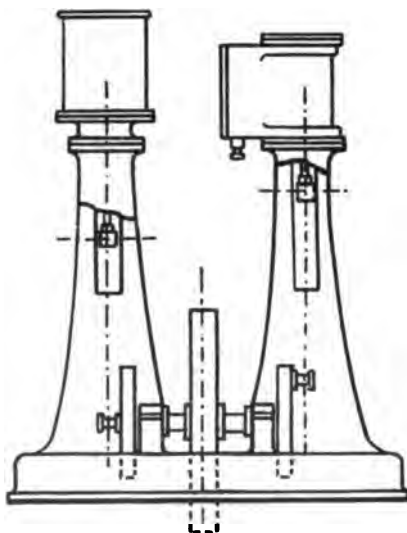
ENGINE AND SINGLE-ACTING COMPRESSOR.
